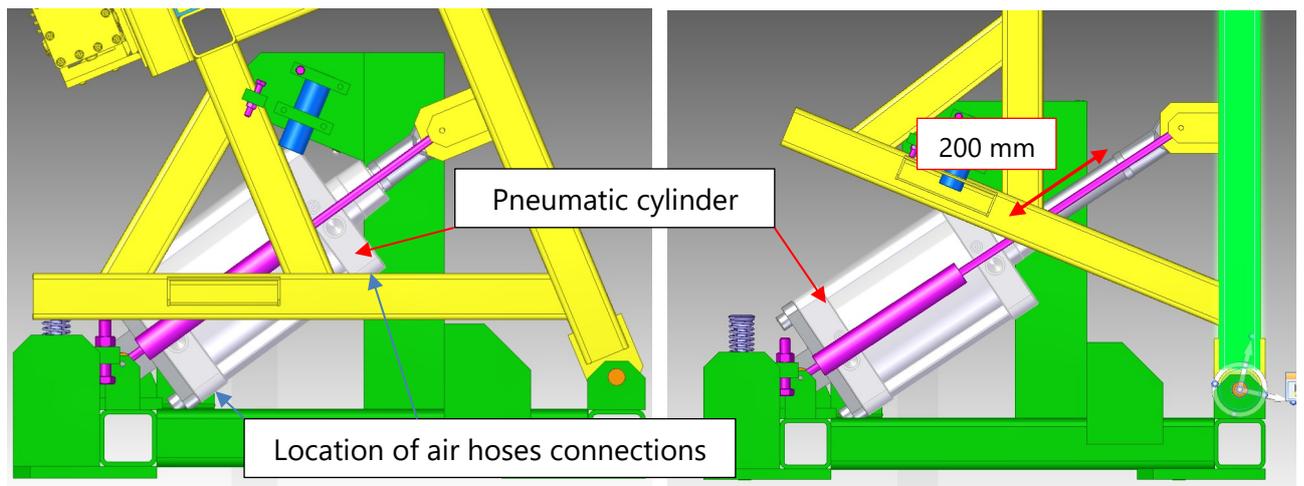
3D view of the pneumatic cylinder when the shutter is closed (left) and when the shutter is opened (right)
